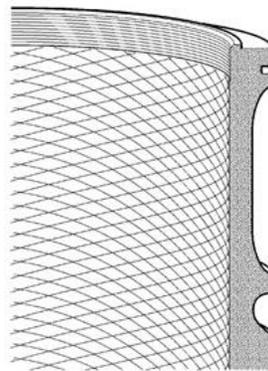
Section view of a cylinder liner with crosshatch pattern
